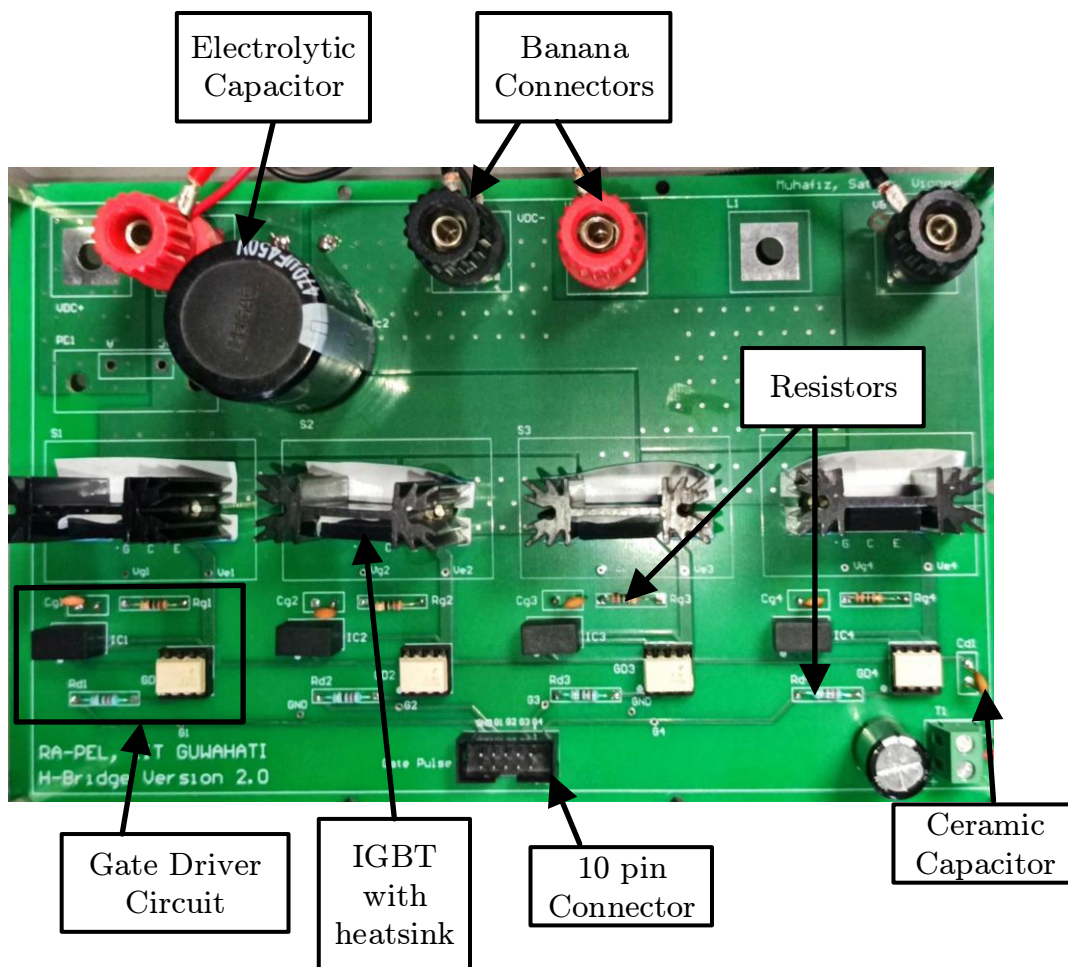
H-Bridge Printed Circuit Board Assembly
